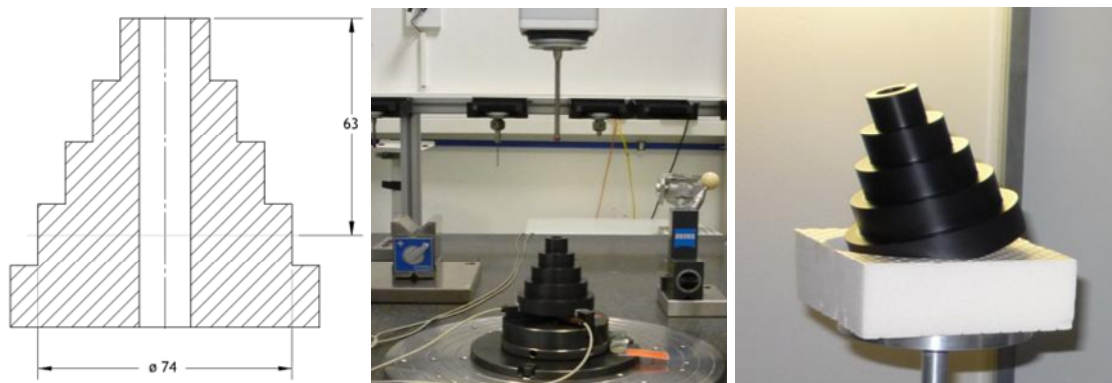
Evaluated feature (left); CMM workpiece setup (center); CT workpiece setup (right).
